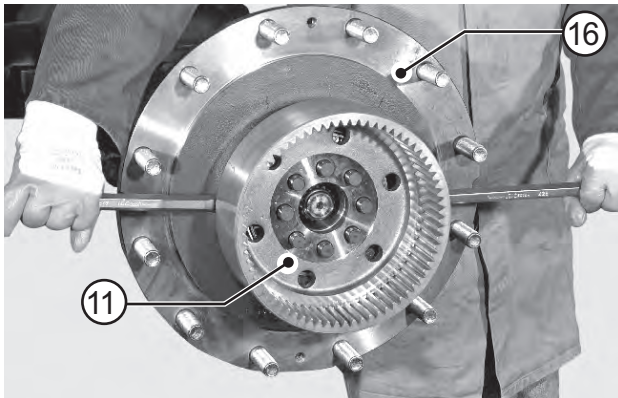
Using two screwdrivers or two levers inserted in the slots provided, disengage the crown wheel (11) from the hub (16). Remove the crown (11).
